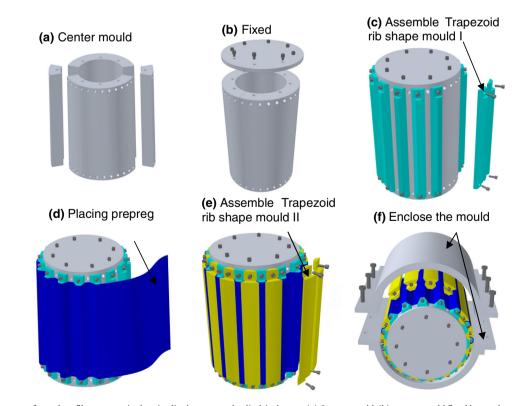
Fabrication process for carbon fiber composite longitudinal corrugated cylindrical cores. (a) Center mould, (b) center mould fixed by steel cover, (c) trapezoid rib shape mould I assembled with center mould, (d) placing carbon fiber composite prepregs into surface of rib shape mould I, (e) assembling rib shape mould I and II together, (f) enclosing the core structure with a pair of outer semi circular steel moulds.
